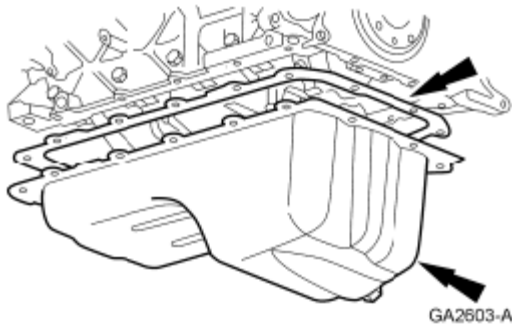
Locating Oil Pan Gasket And Oil Pan
